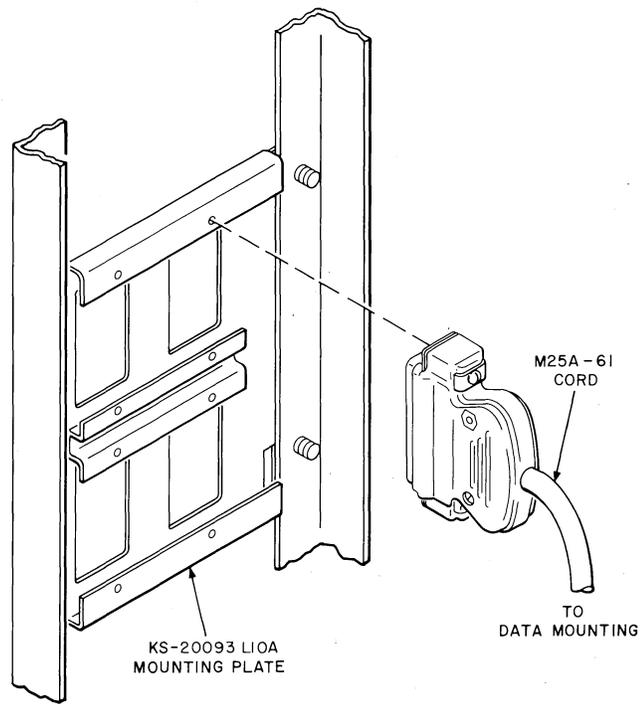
Typical Installation of an M25A-61 Cord Connected to the Customer Interface Section L10A Mounting Plate, Rear View
